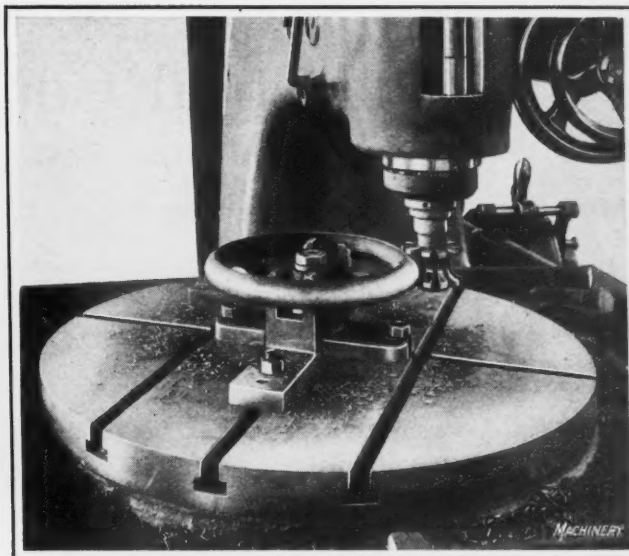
Set-up for machining Rim of Milling Machine Handwheels
